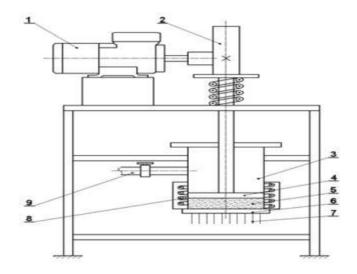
Fresh *Bun* pressing process by a piston – cylinder 1-Electric Motor, 2-Cam mechanism, 3-Cylinder, 4- Piston, 5-Rice Powder, 6-Mold, 7-Fresh Bun, 8-Electrical resistor, 9-Rice powder feeder
